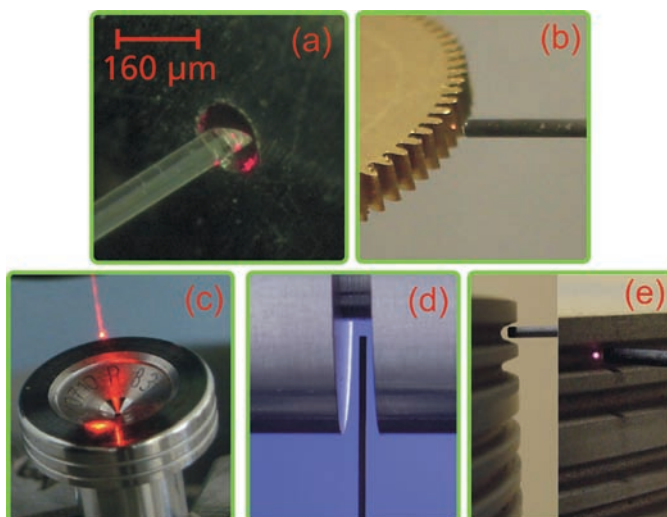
Applications of the fiber optical form metrology: (a) roundness inspection in micro boreholes (diameter 125 μm), (b) roundness and run-out inspection of gear wheels, (c) quality inspection in valves and nozzle bodies, (d) roundness and run-out inspection of structured shafts and (e) roundness and run-out inspection of structured grinding disks
